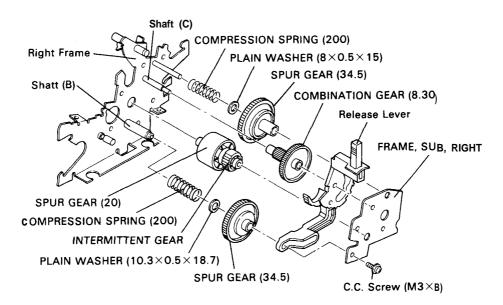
Disassembly of Frame Assembly, RIGHT
